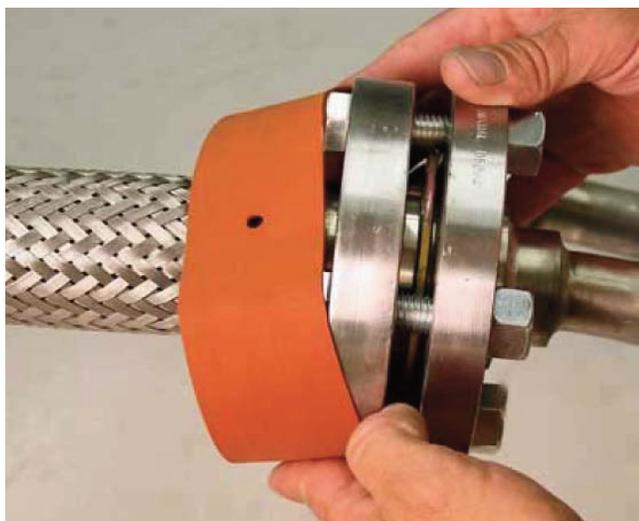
Installation of Band for Flange Leak Testing. (Courtesy Flange Band-It LLC)
